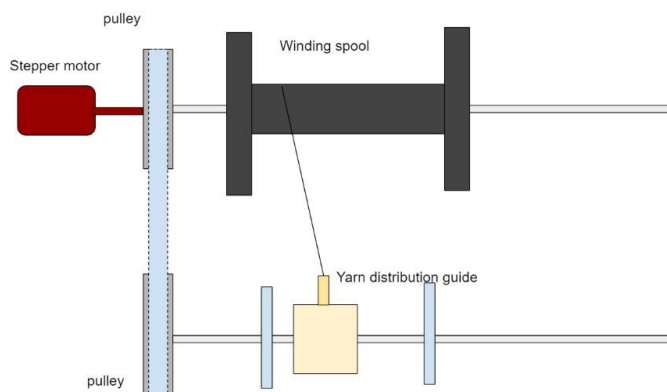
Schematic of the winding mechanism where the motor drives the winding spool and belt transfer the power needed to the linear yarn distributor.
